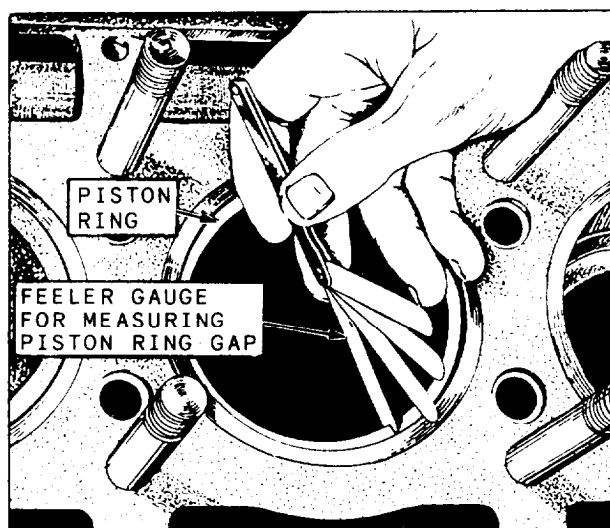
Measuring ring gap clearance in cylinder bore.
